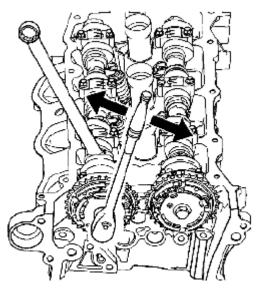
Loosening Camshaft Position Actuator Bolt Courtesy of SUZUKI OF AMERICA CORP.
